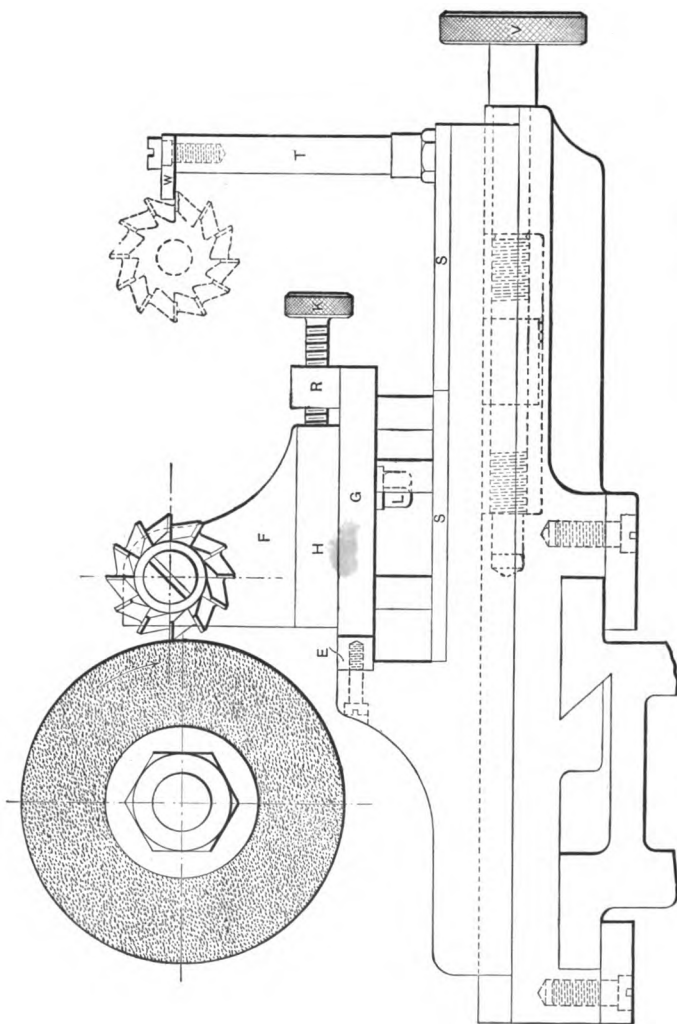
Grinding Device for Fluting Cutters, on Table of Grinder
